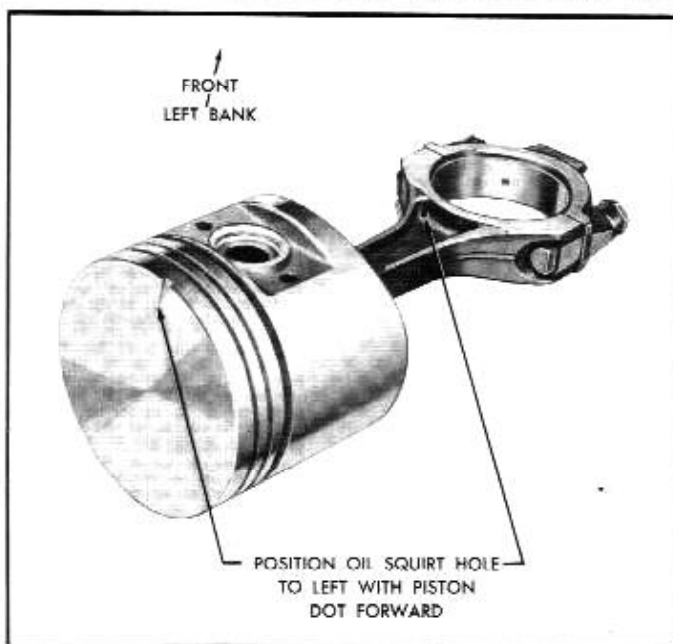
A-112—Position of Piston Assembly and Connecting Rod—Left Bank
